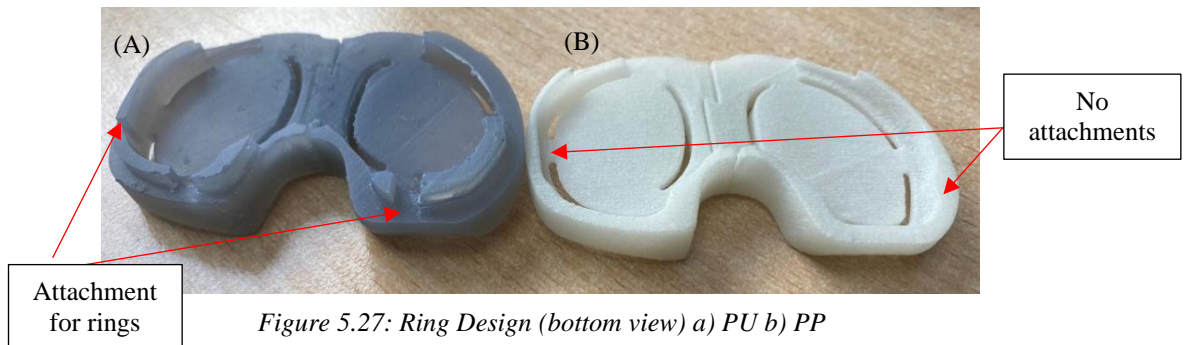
Ring Design (bottom view) a) PU b) PP
